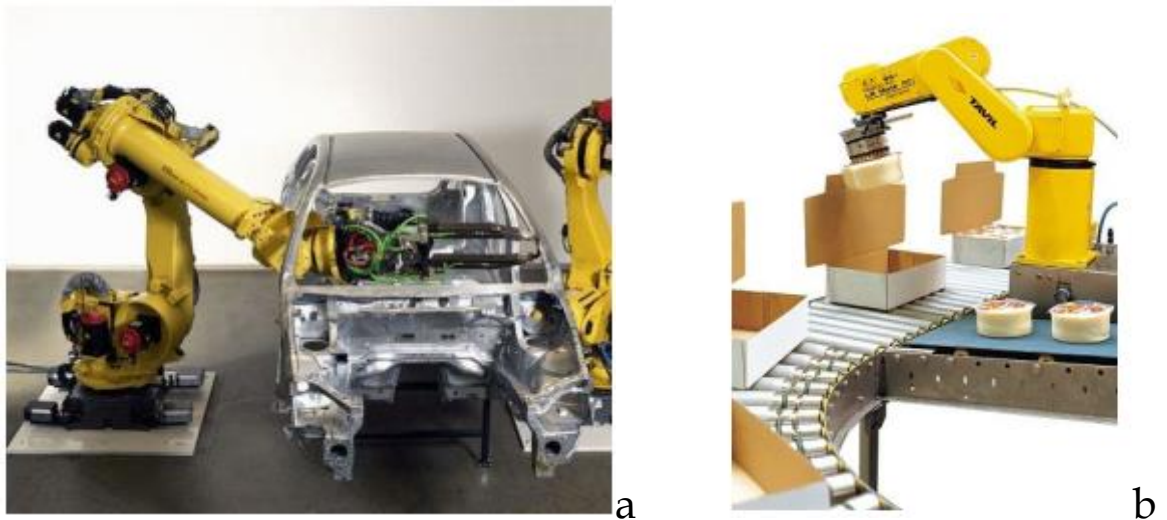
Industrial works: a - welding; b - packing
